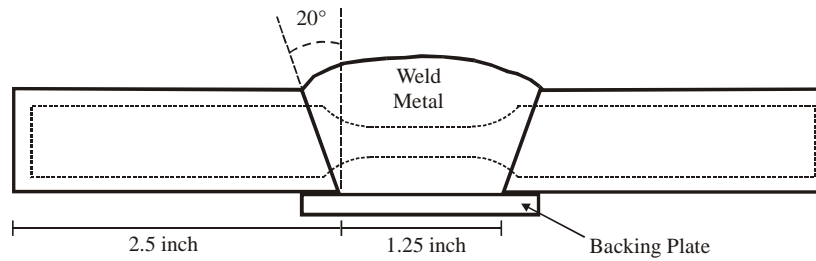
Schematic of wide-gap weld joint for transverse weld metal creep-fatigue specimens
